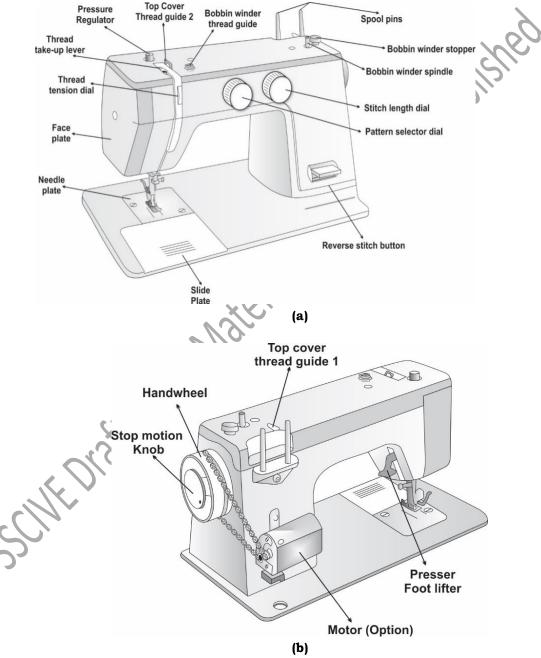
(a & b) Parts of semi automatic embroidery machine
